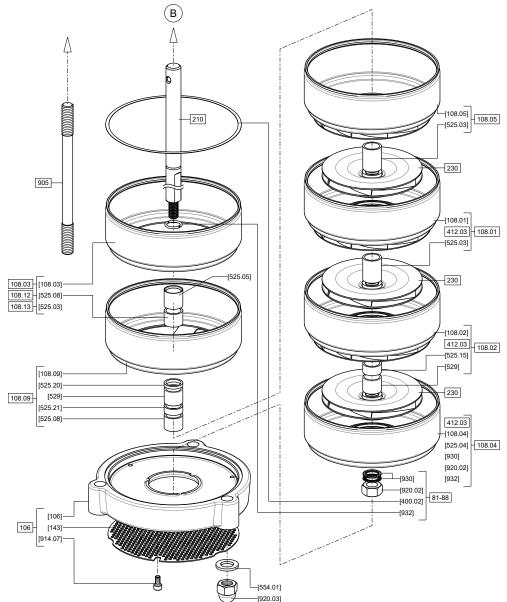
[TPG-SP3014100-A]: Exploded view of the hydraulic system [parts in square brackets can be supplied in packaging units only]
